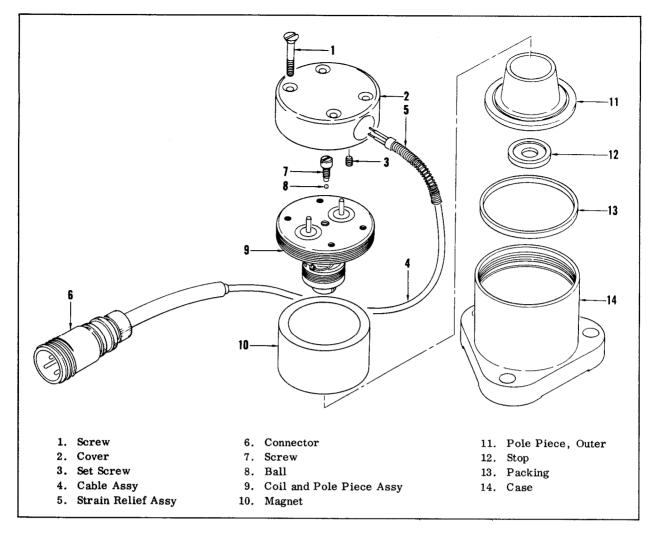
Velocity Vibration Transducer Assembly Type 4-118-0107, Exploded View
